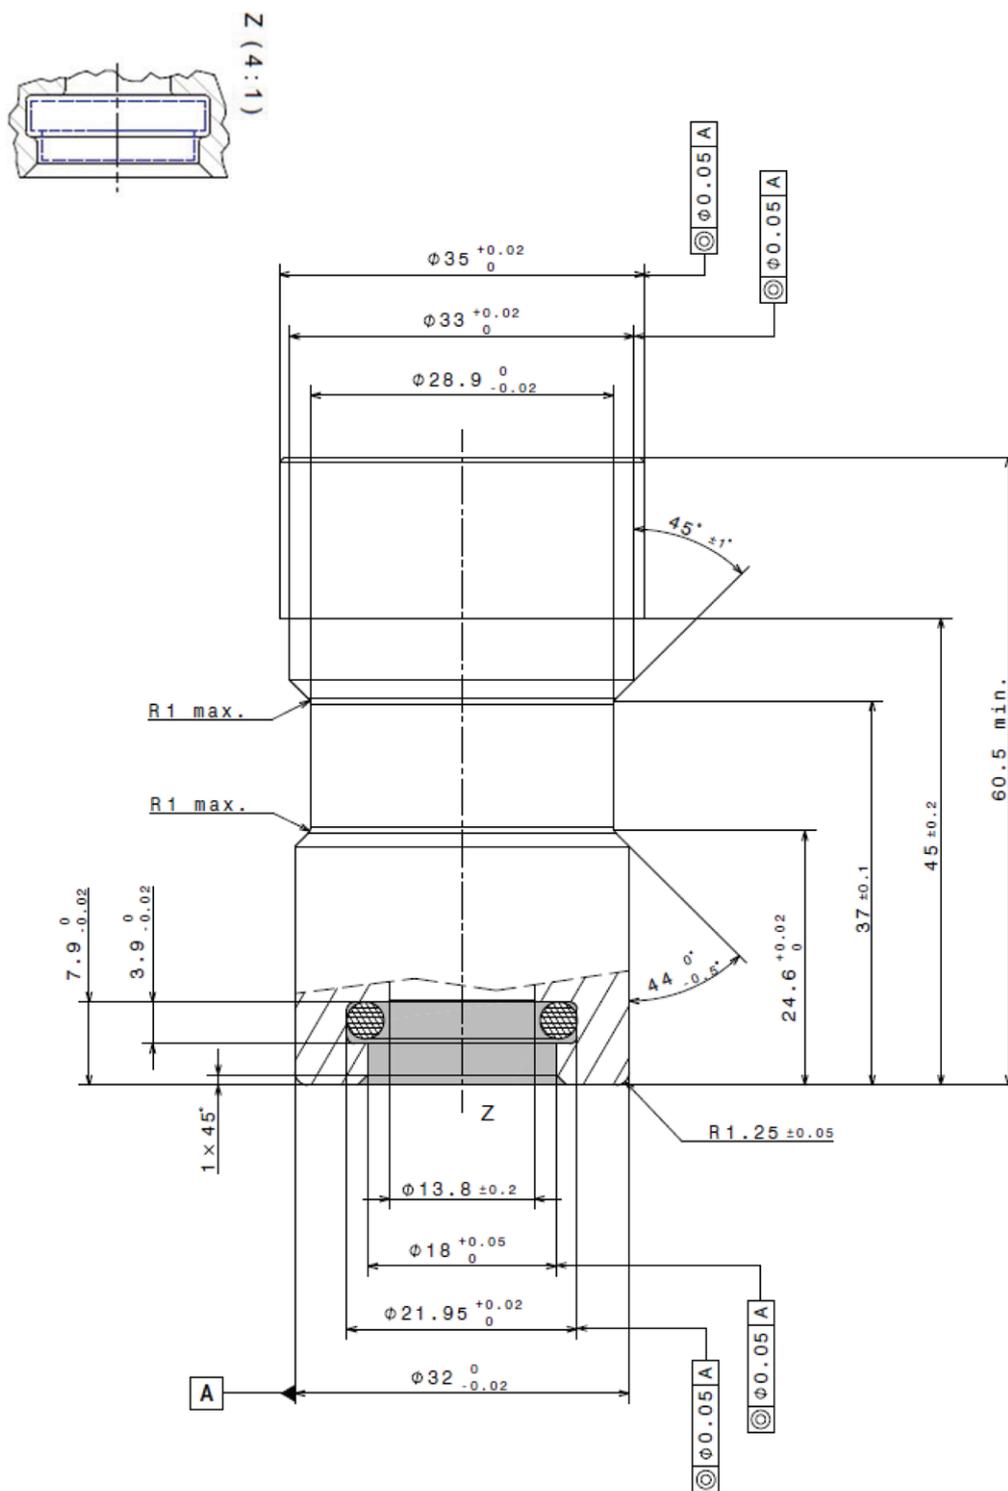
M250 — “Tight fit” tolerances
